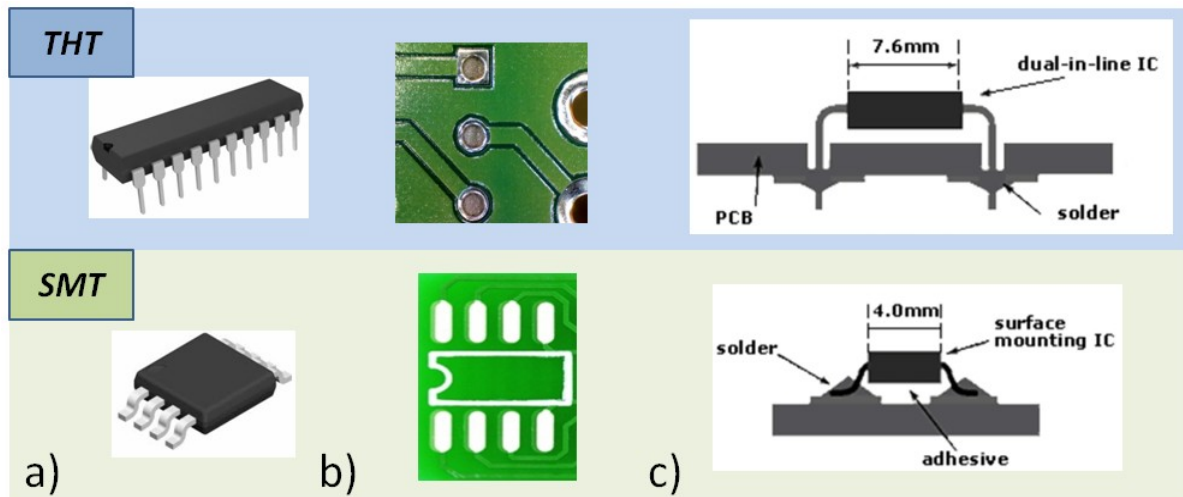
THT and SMT (SOIC) packaged examples a) Component¹¹ b) PCB layout¹² and c) resistor example¹³
